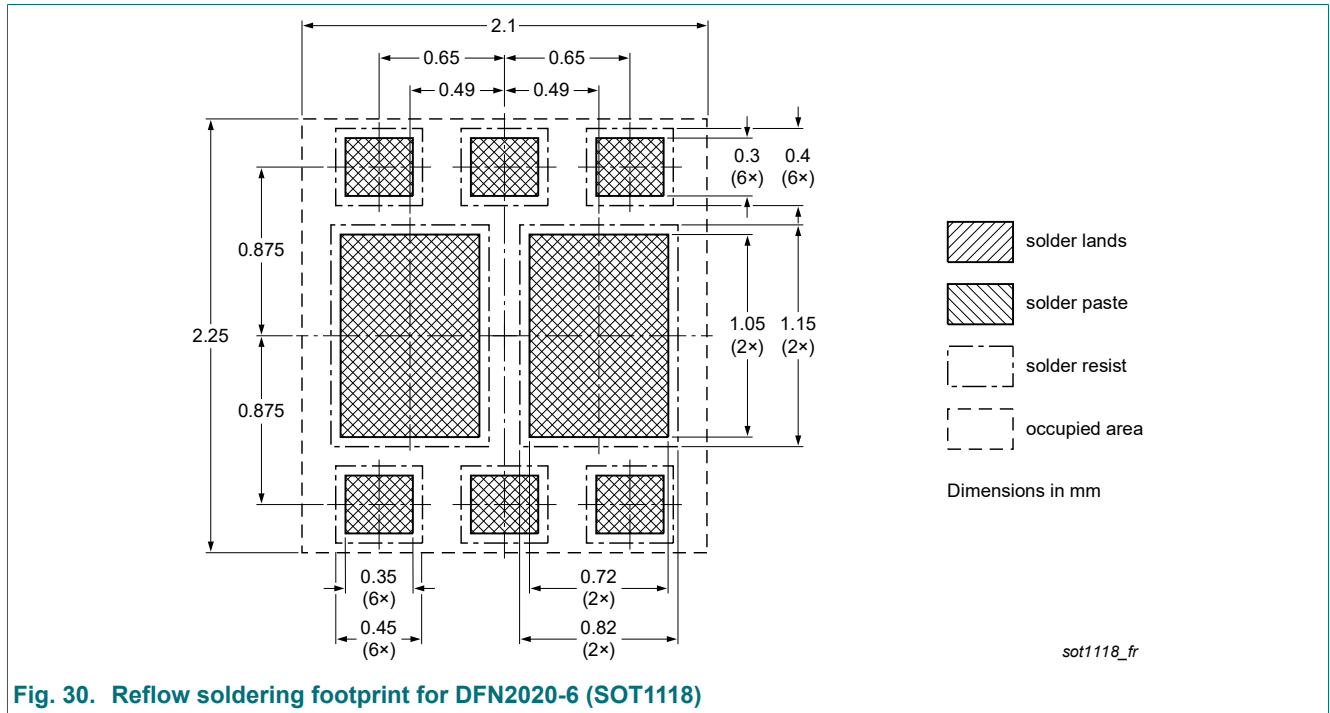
Reflow soldering footprint for DFN2020-6 (SOT1118)
